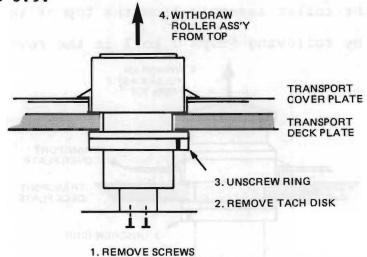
TACHOMETER ROLLER DISASSEMBLY
